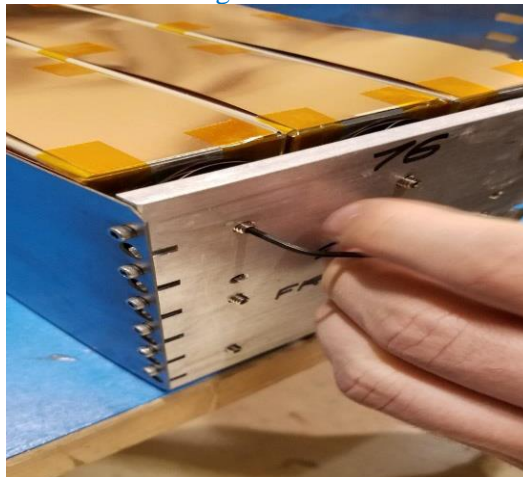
View of flange 1 with set screws and 4-40 allen head screws
